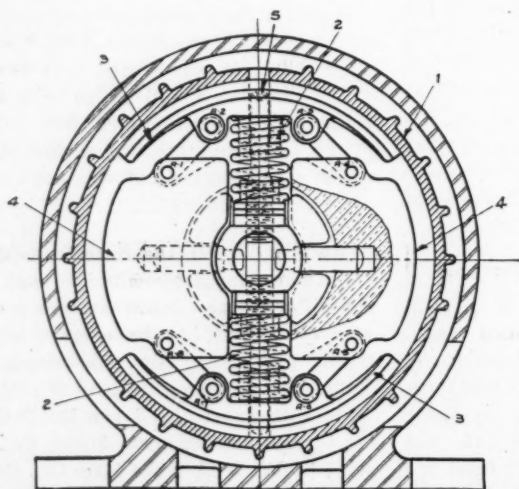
Sectional view of one form of Gray & Davis friction drive, perpendicular to armature shaft
